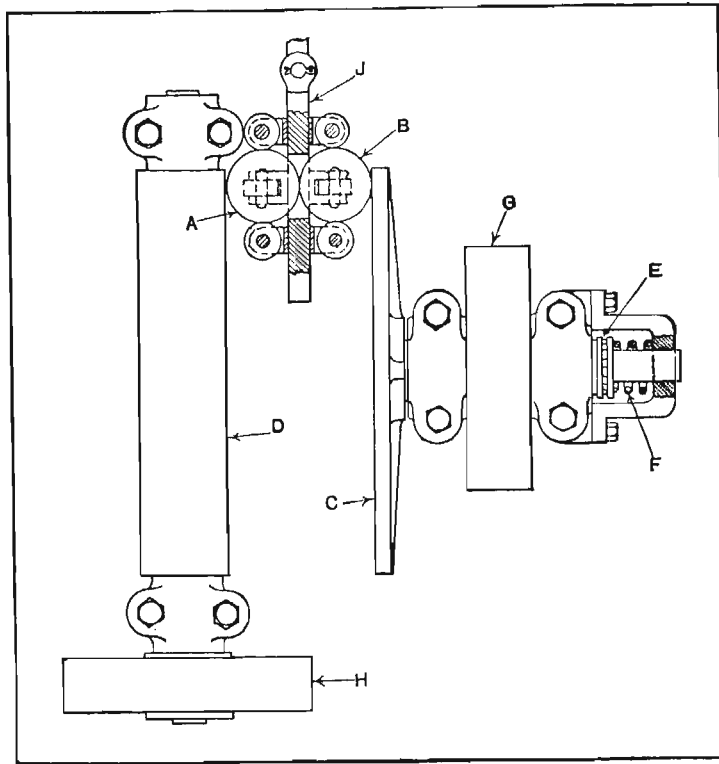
Speed-changing Mechanism of Friction-disk and Ball Type
